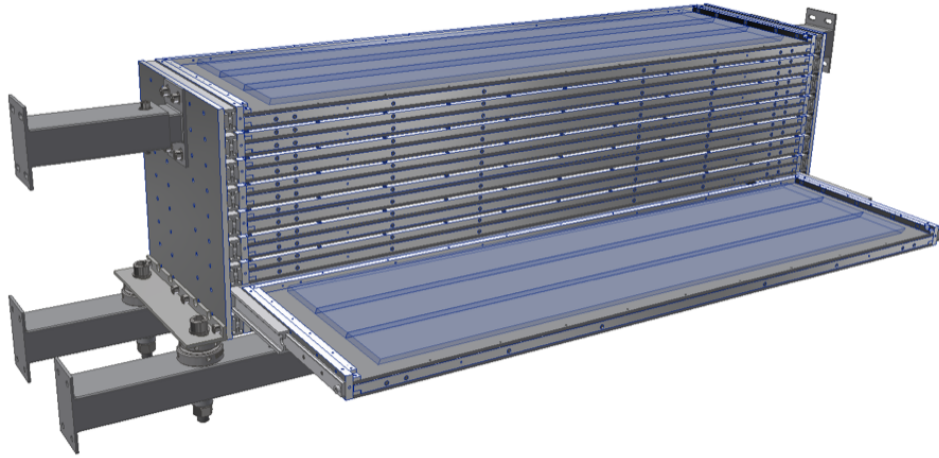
CAD model of the veto system. Nine drawers provide 18 slots for arranging the veto and lead absorber layers. The drawers are installed using a cradle made of steel beams.
